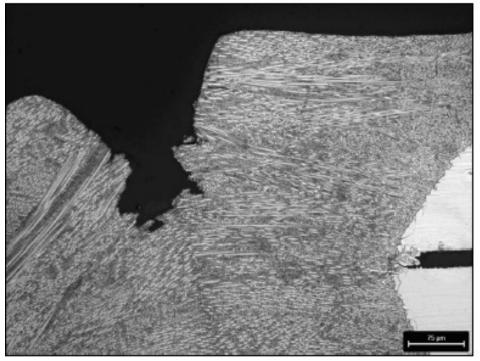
Defective weld after etching Tests performed by an independent test facility.
